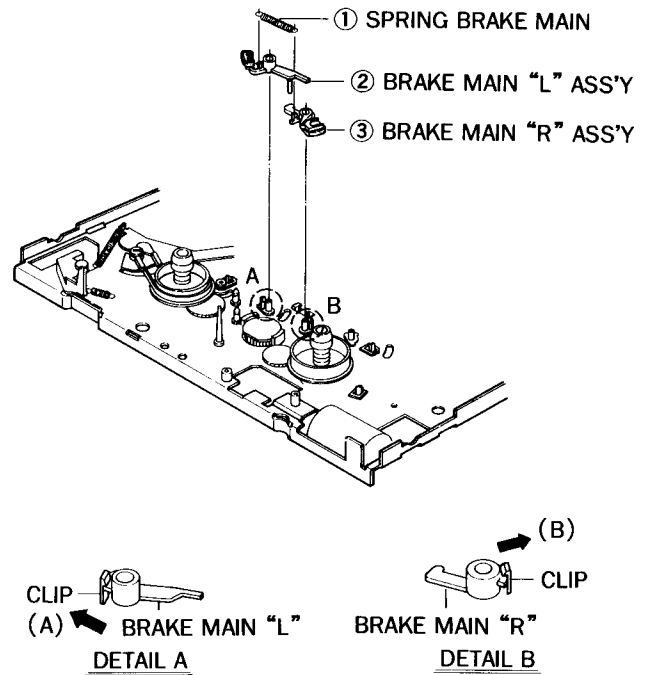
Brake Main "L" & "R" Ass'y Removal
